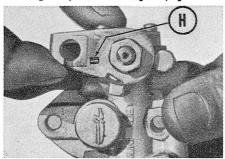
View of the oil pump adjustment hole aligned with the mark on pump body. Hole should align with mark when the throttle is in maximum speed position.
